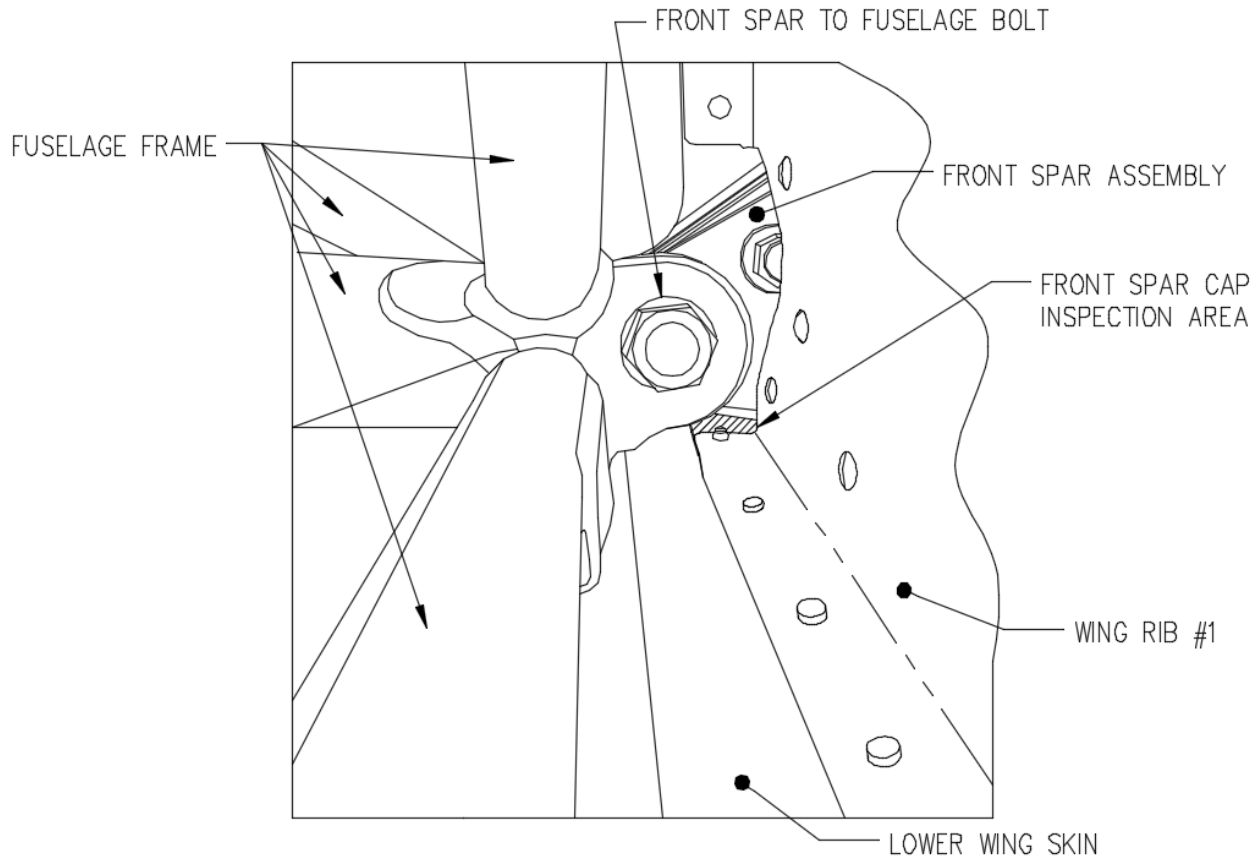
Front Spar Cap initial inspection area, RHS wing shown
